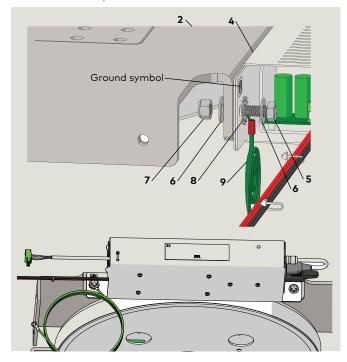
Motion Assist 360 power supply mounting to top drive plate
